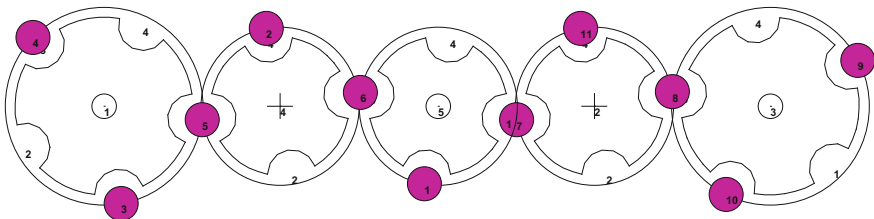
Configuration of a flat braiding machine with 5-4-4-4-5 Slot gears with 11 carriers
